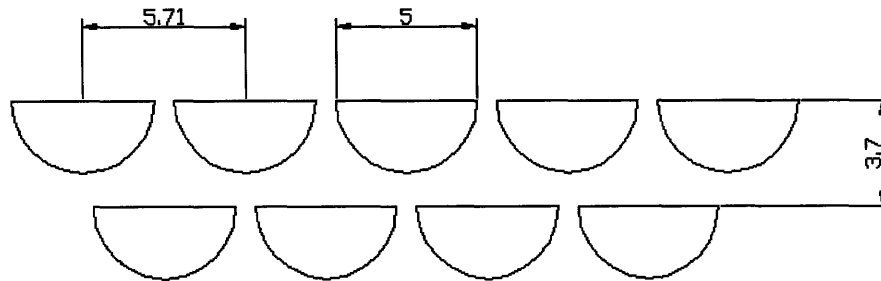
Drawing of a segment of one hot and one cold row of channels in the gas/water decay heat removal heat exchangers with dimensions in mm.
